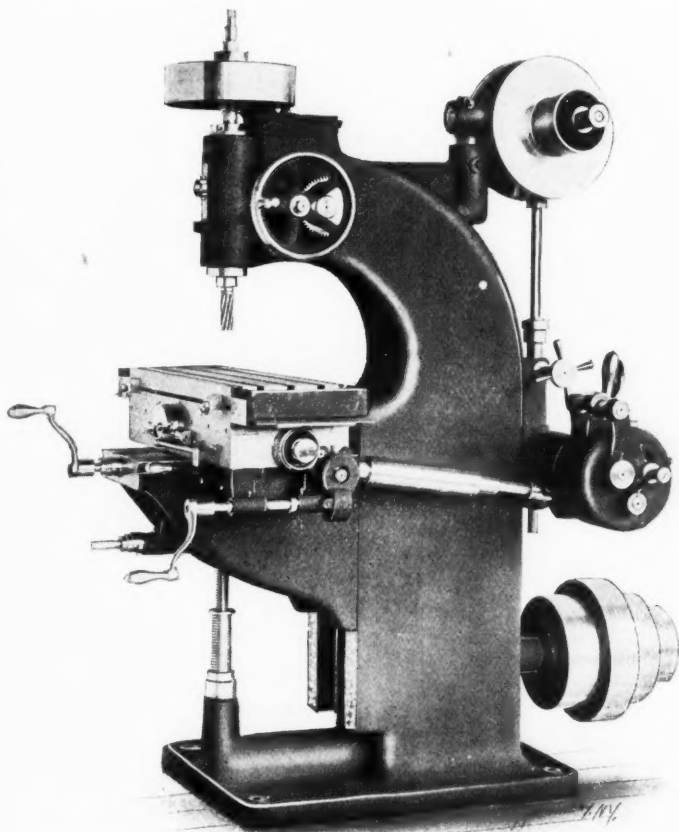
Side View of Friction Feed Vertical Milling Machine, built by Becker Milling Machine Co., Hyde Park, Mass.
